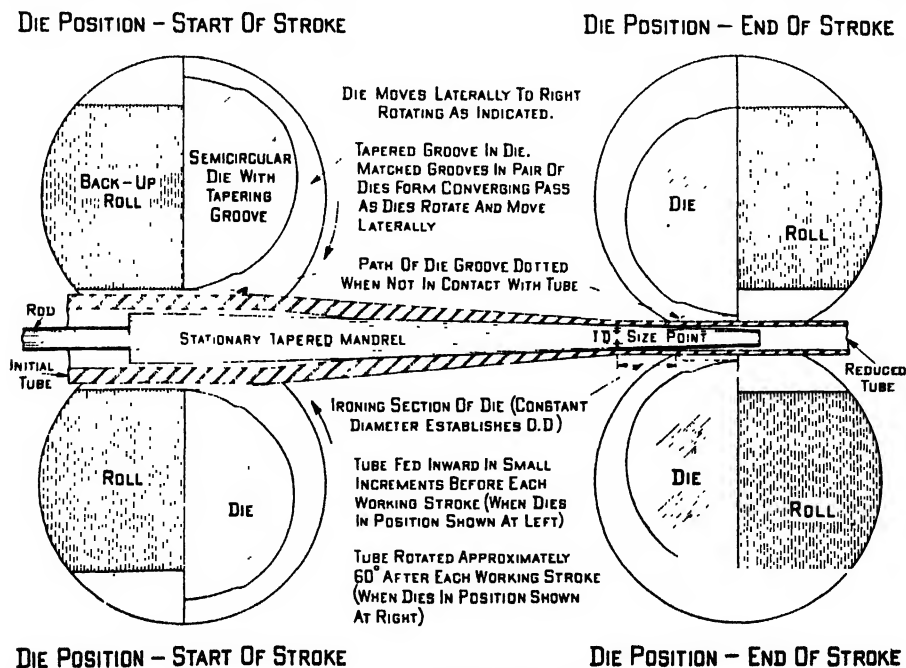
42. Vertical section through tube reducer pass—showing dies at start and end of stroke.
